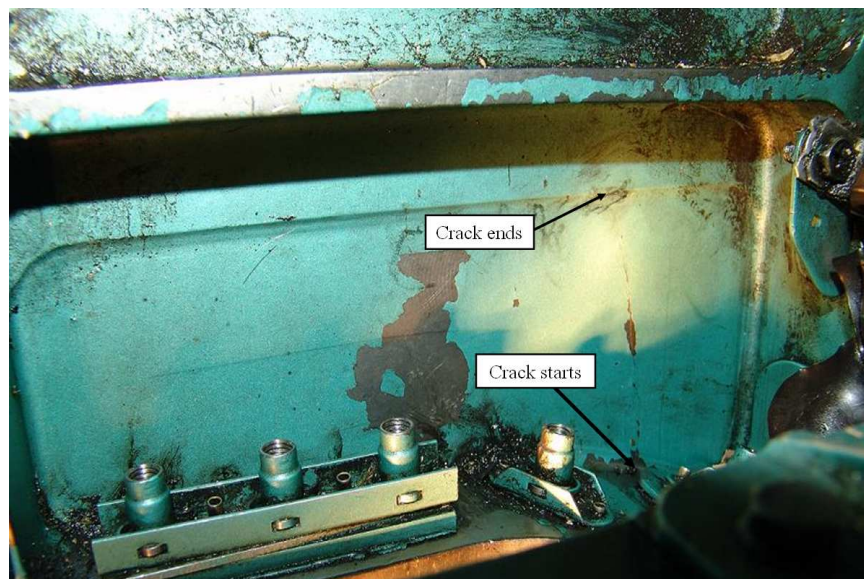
F-15 bulkhead: aft view of cracked bulkhead section
